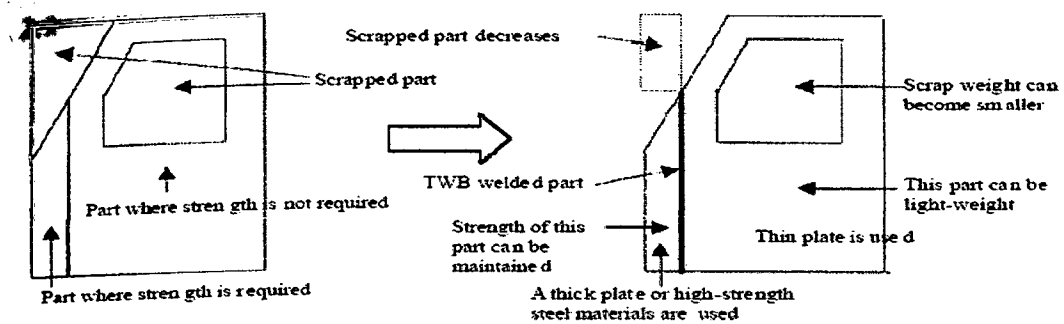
Steel door with tailor welded blank (Toyo Kōtetsu Co. Ltd)
